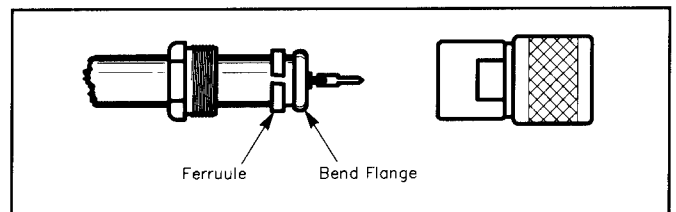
Assembling a Type-N connector to $\frac{1}{2}$ -in. Hardline.
